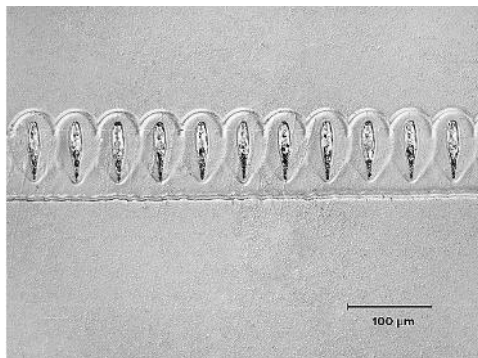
Optical picture of the weld seam (etched 10% HF).
